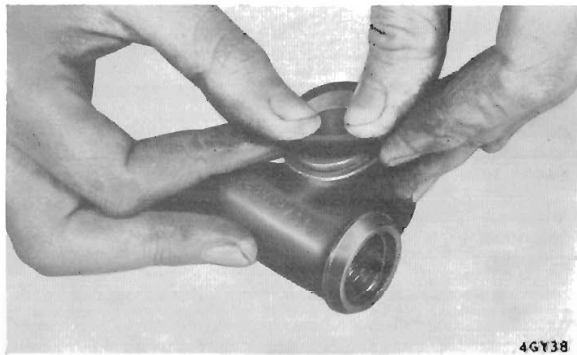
Fitting seals to lower fulcrum nylon bushes
